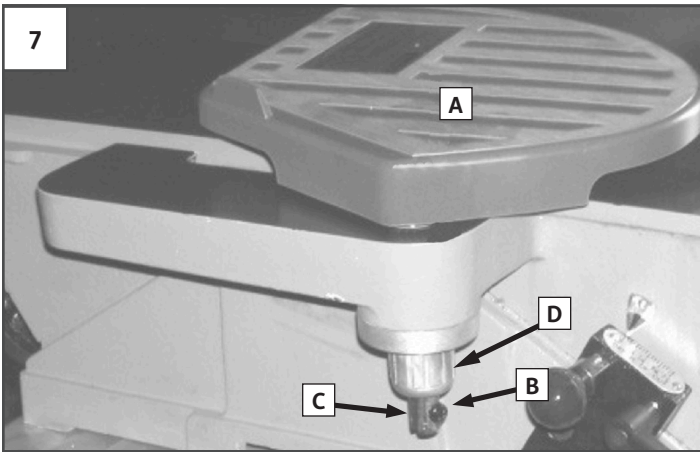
INSTALLING CUTTERHEAD GUARD
